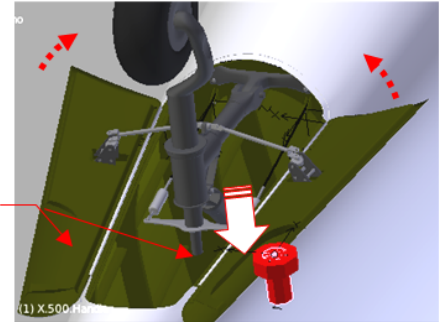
DETAILS OF THE DOOR RETRACTION MECHANISM
